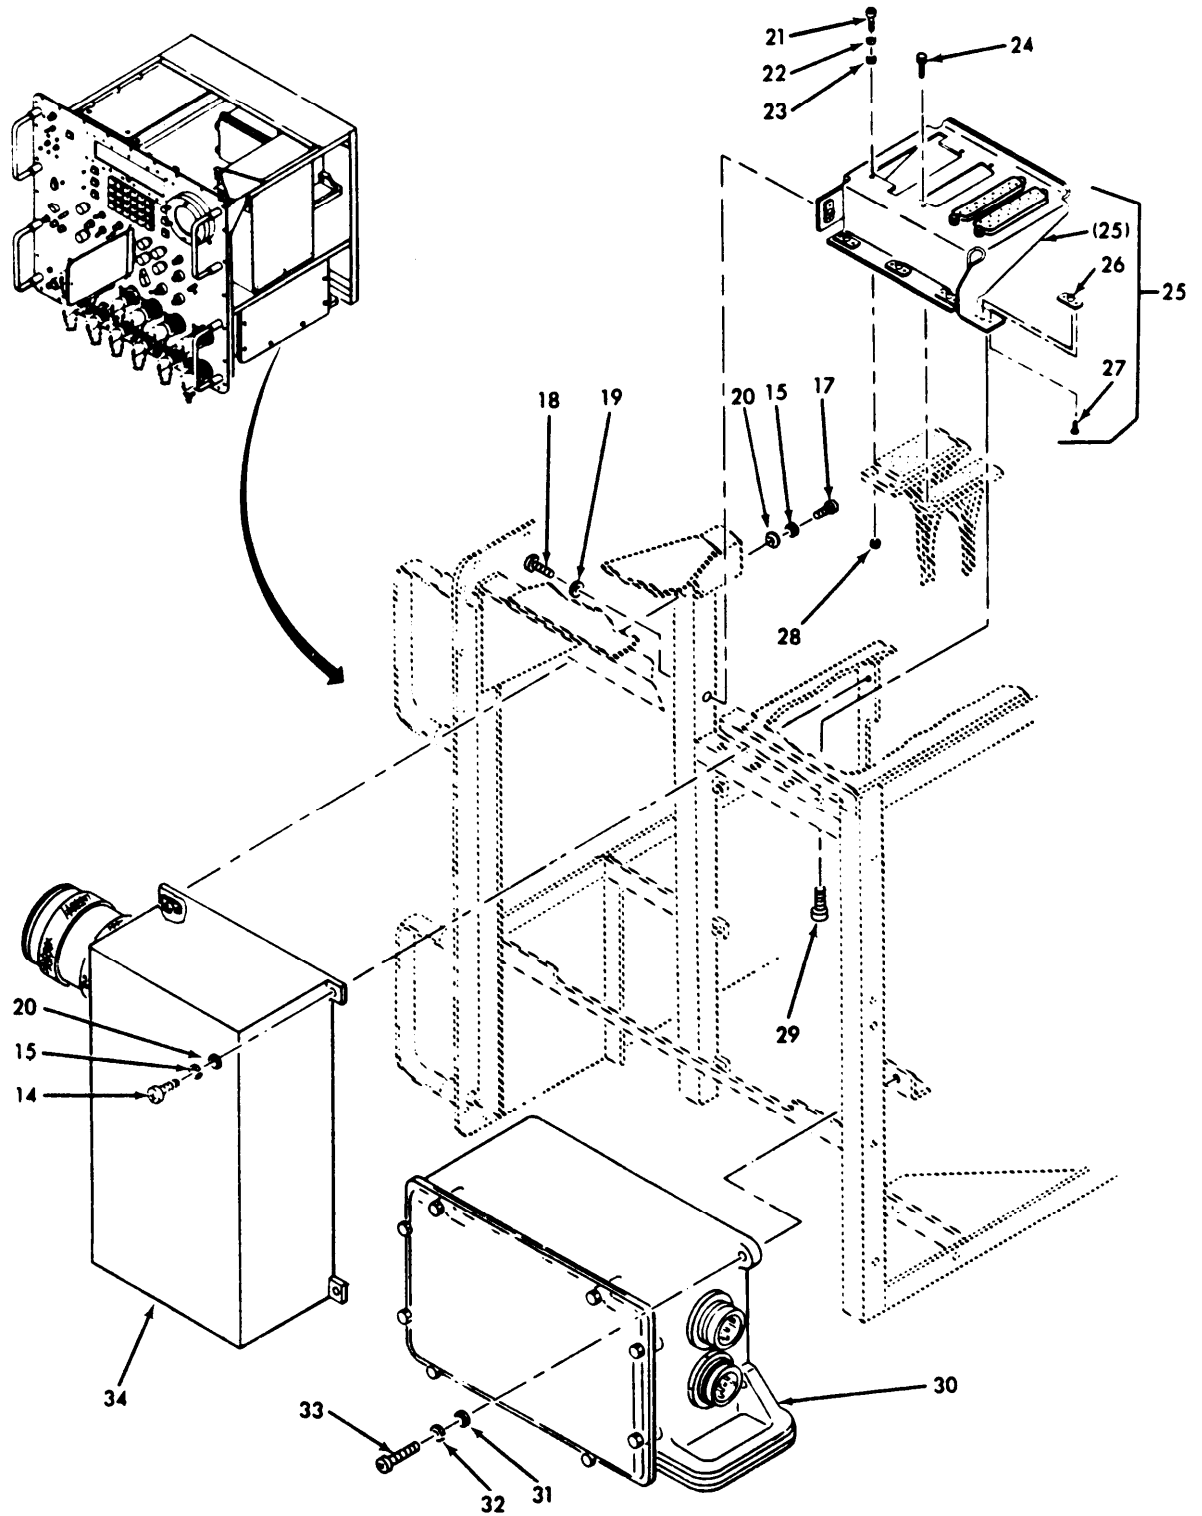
THERMAL SYSTEM TEST CONTROLLER CHASSIS
